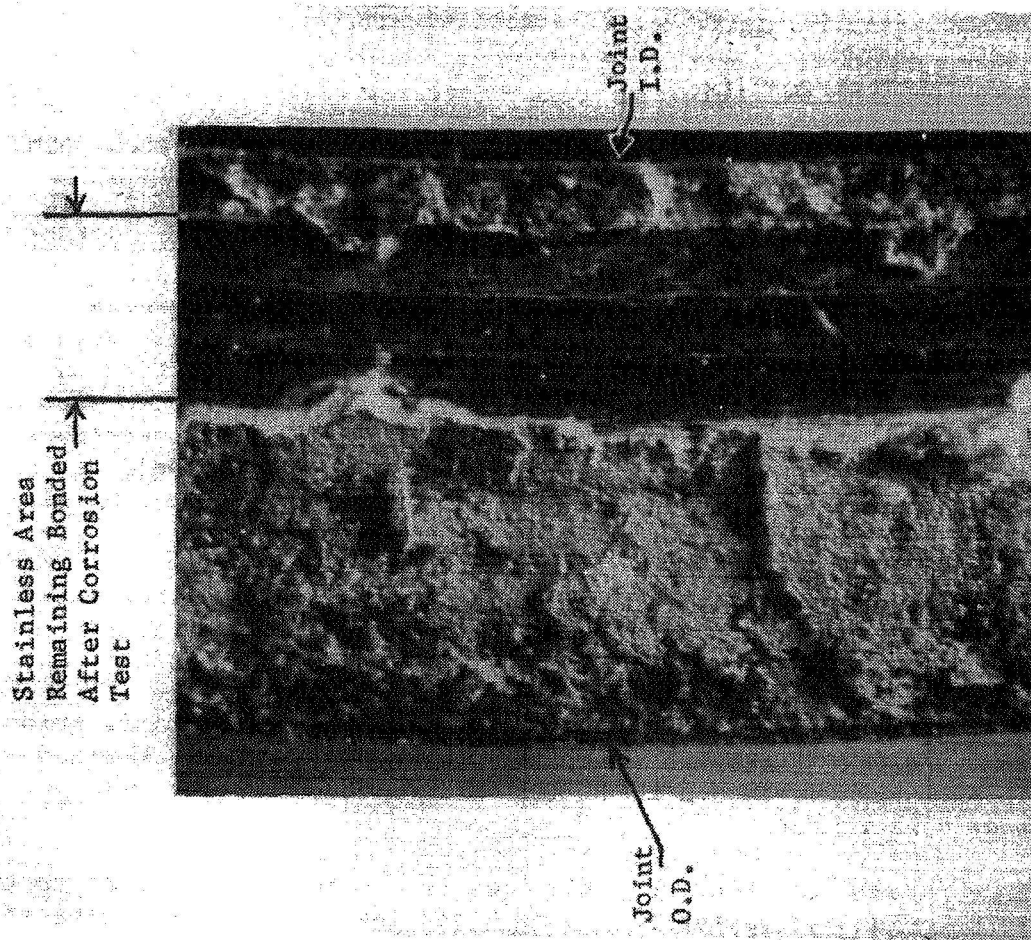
Inertia Welded Joint After Corrosion and Burst Test-View of Stainless Surface at Interface
